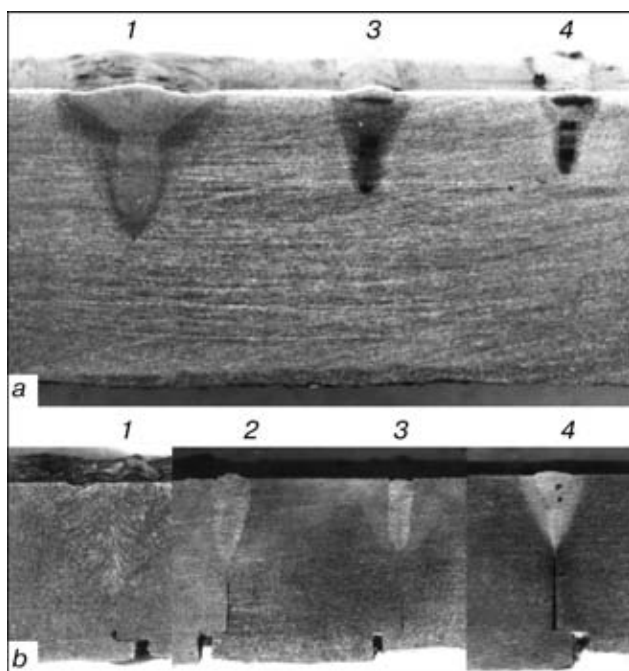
Macrosections of laser bead-on-plate welds made using no filler (*a*) and butt welded joints made by the combined method (*b*) on a wall of $\delta = 15$ mm of St.3 tubular samples at a speed of 30 (1), 60 (2), 90 (3) and 120 (4) m/h
